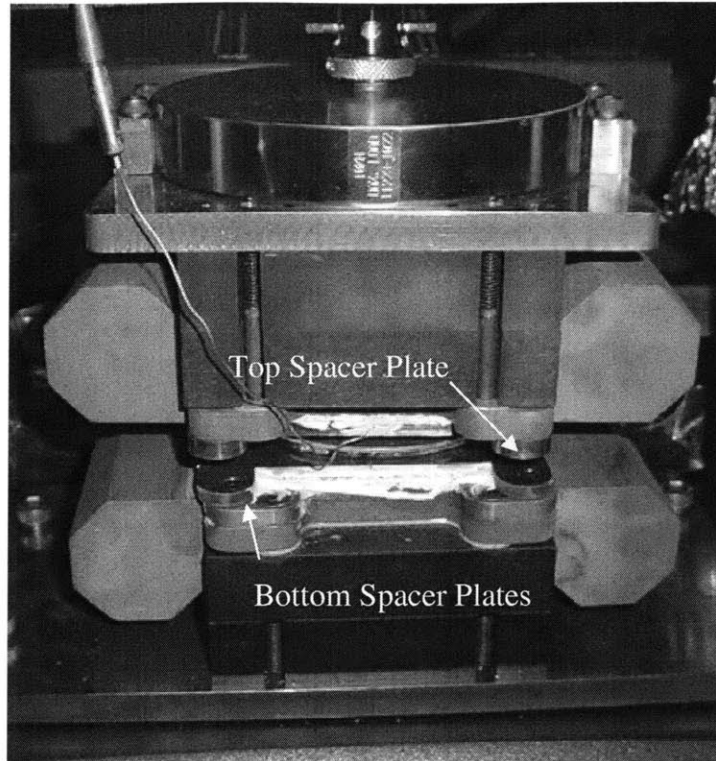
The platen assembly without the vacuum chuck and with the top and bottom spacer plates
